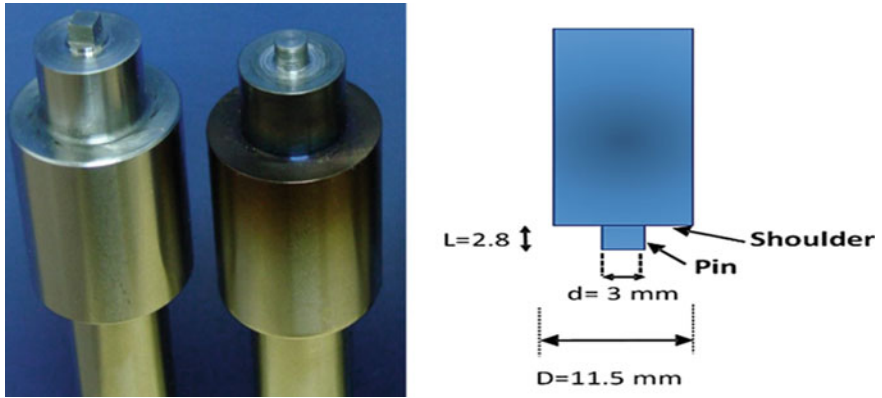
Two different tool pin geometries with the dimensions of tool pin and shoulder [27]
